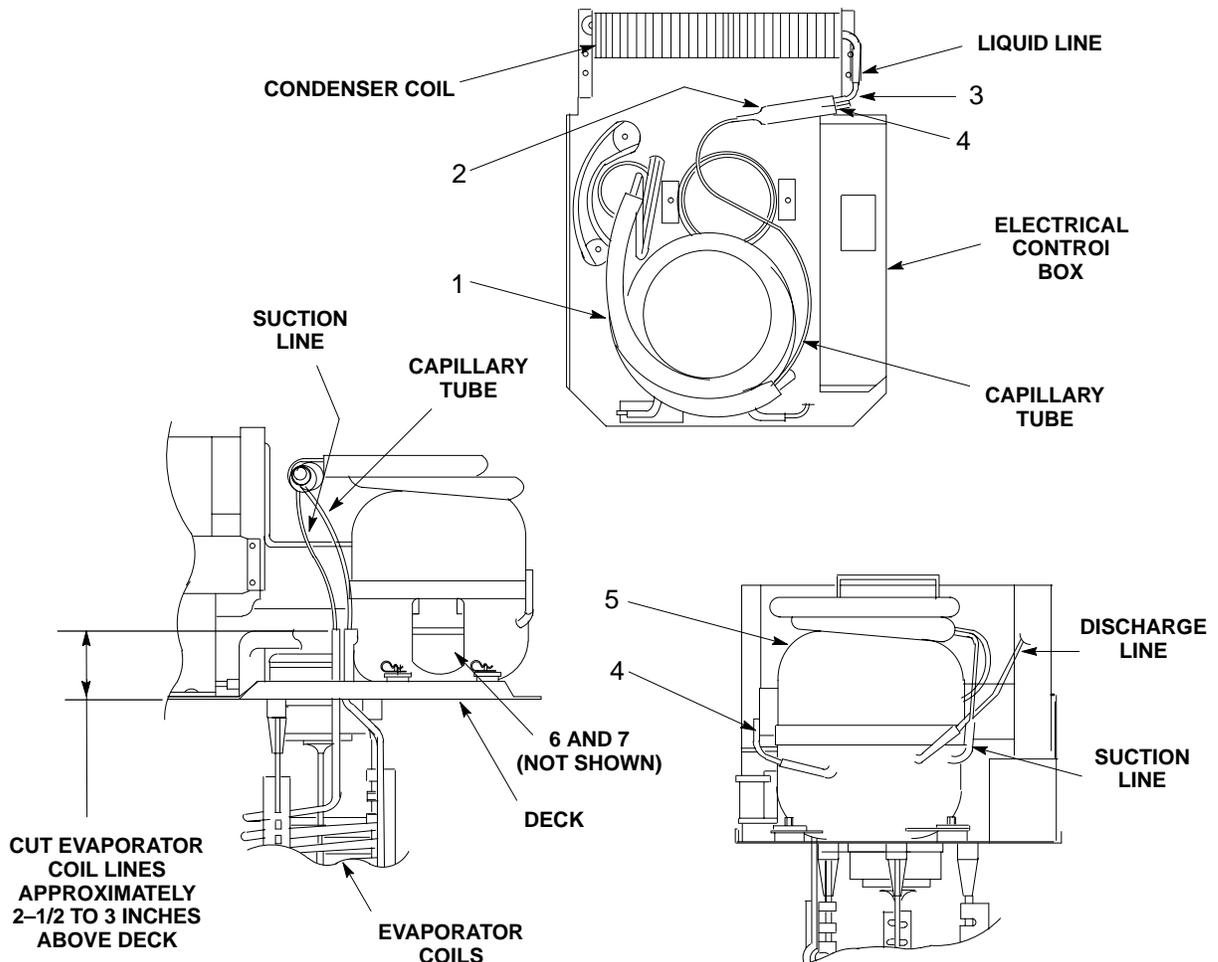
PARTS IDENTIFICATION (SOME PARTS NOT SHOWN FOR CLARITY)
